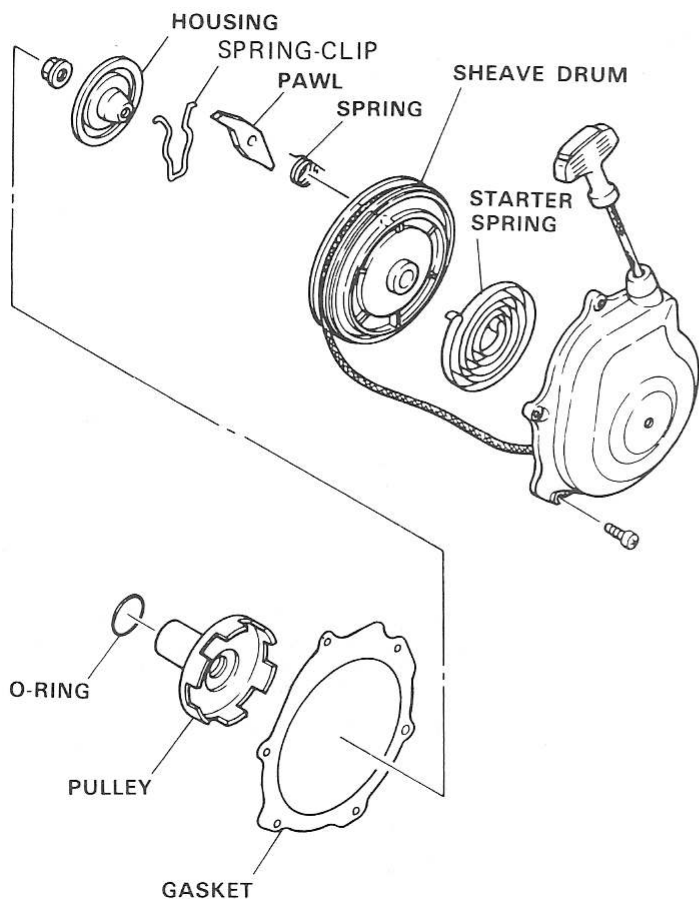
B.35 Recoil starter components — exploded view (Sec 21)
